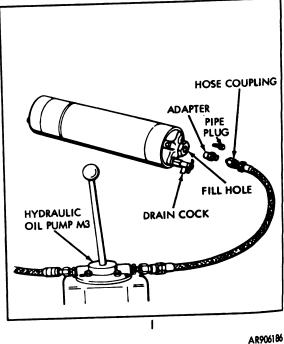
Replenisher disassembly or assembly (2 of 3).
